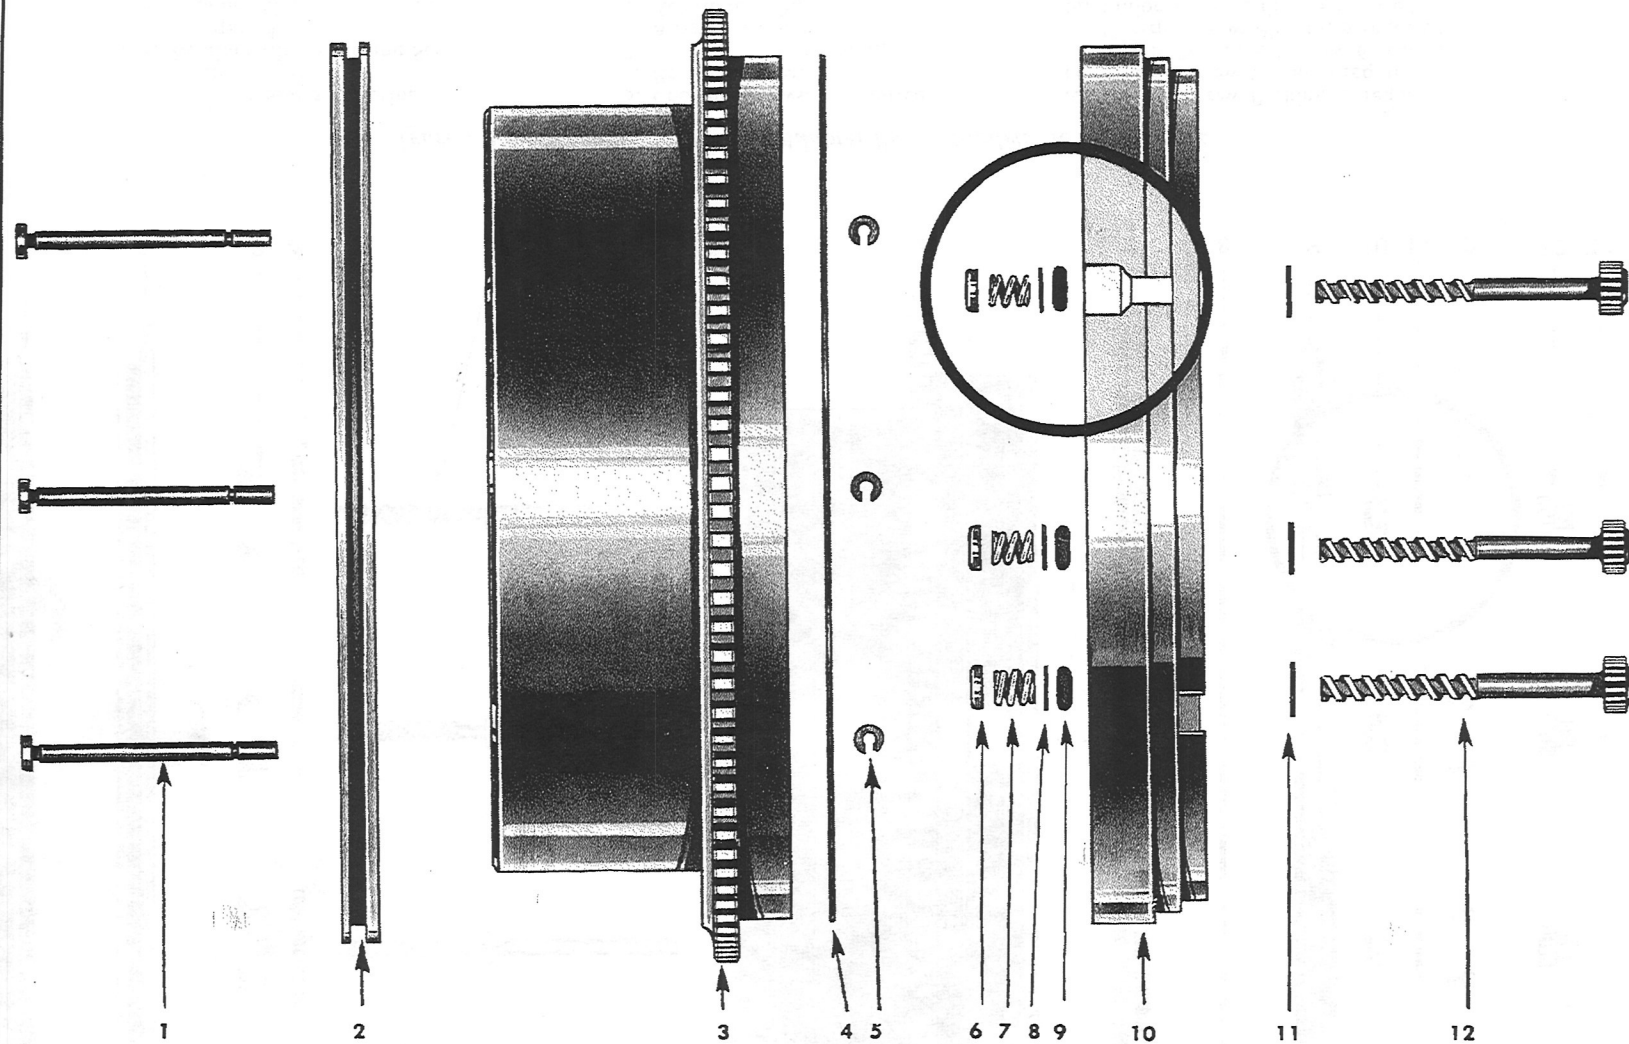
A—Regulator Gear and Adapter Parts (Models A632S-C1, -B1, -B5)
